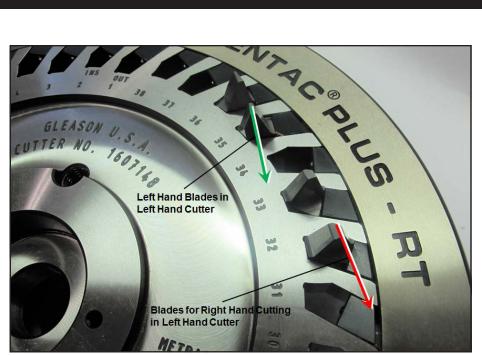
Standard blades for LH cutter and special blades for RH gear.
